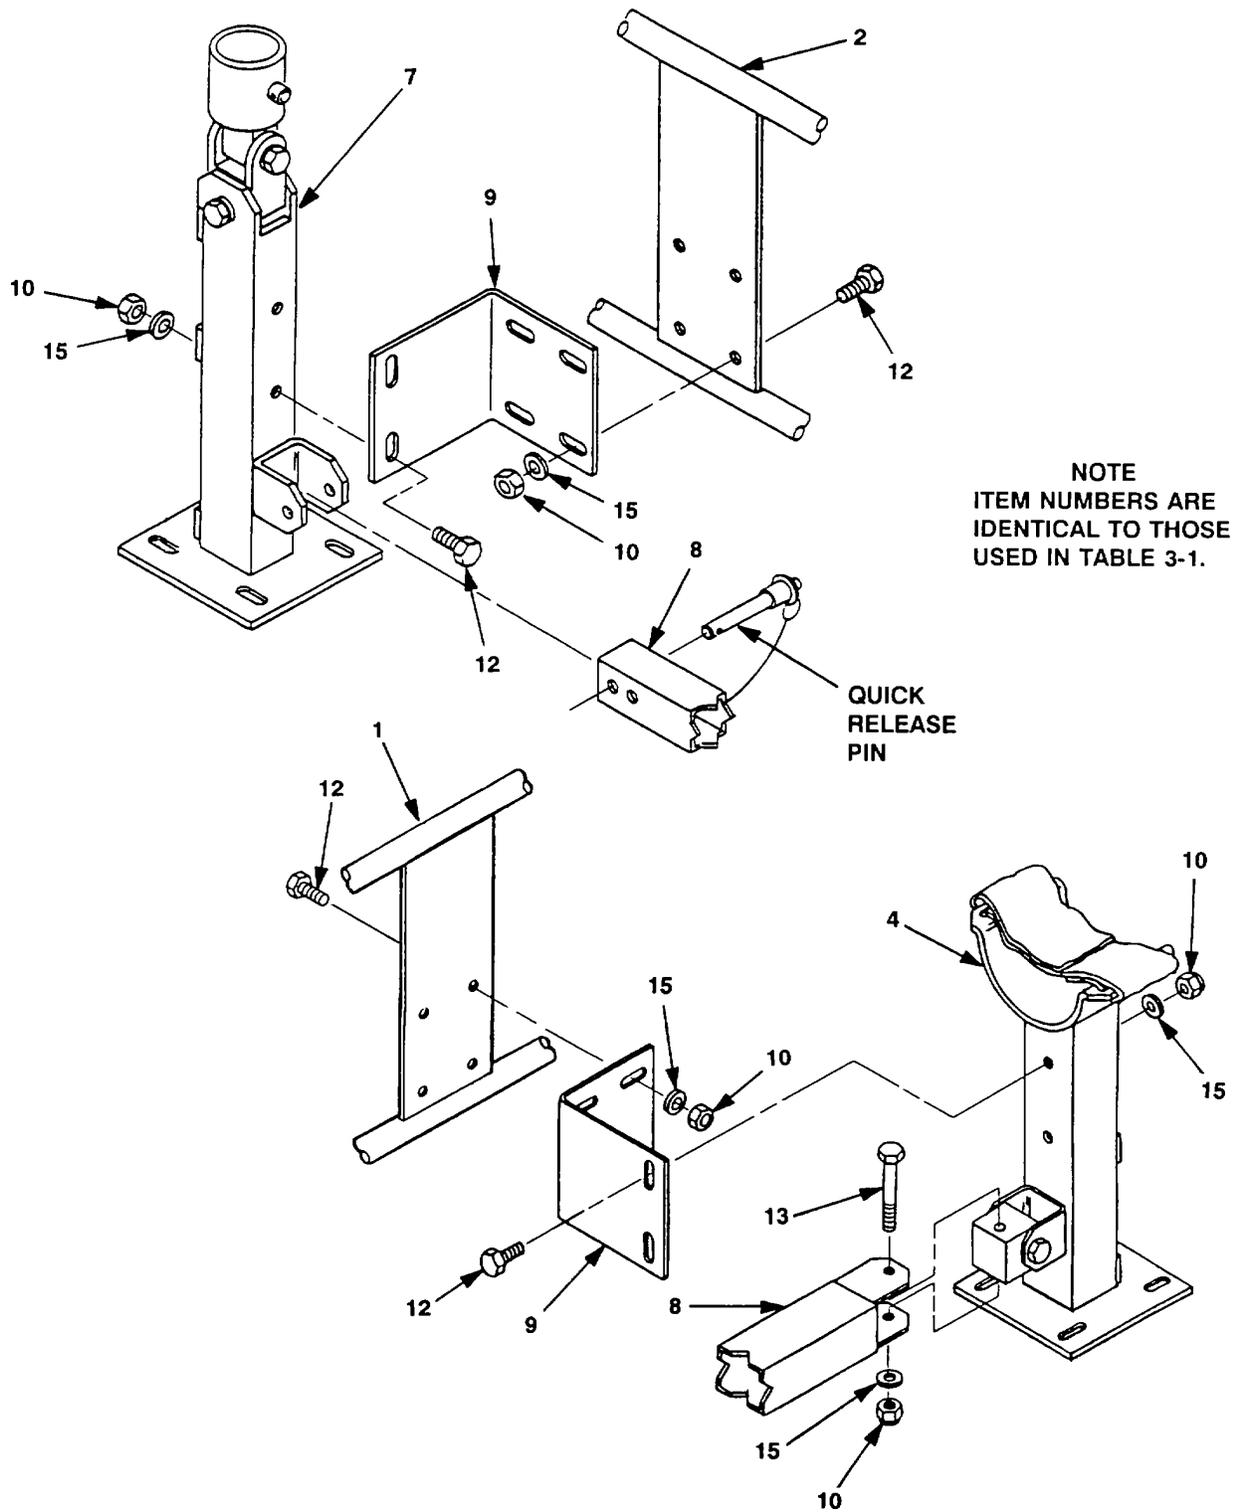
Tracked Vehicle Mounting Kit and Mast Installation (Sheet 1 of 3)
